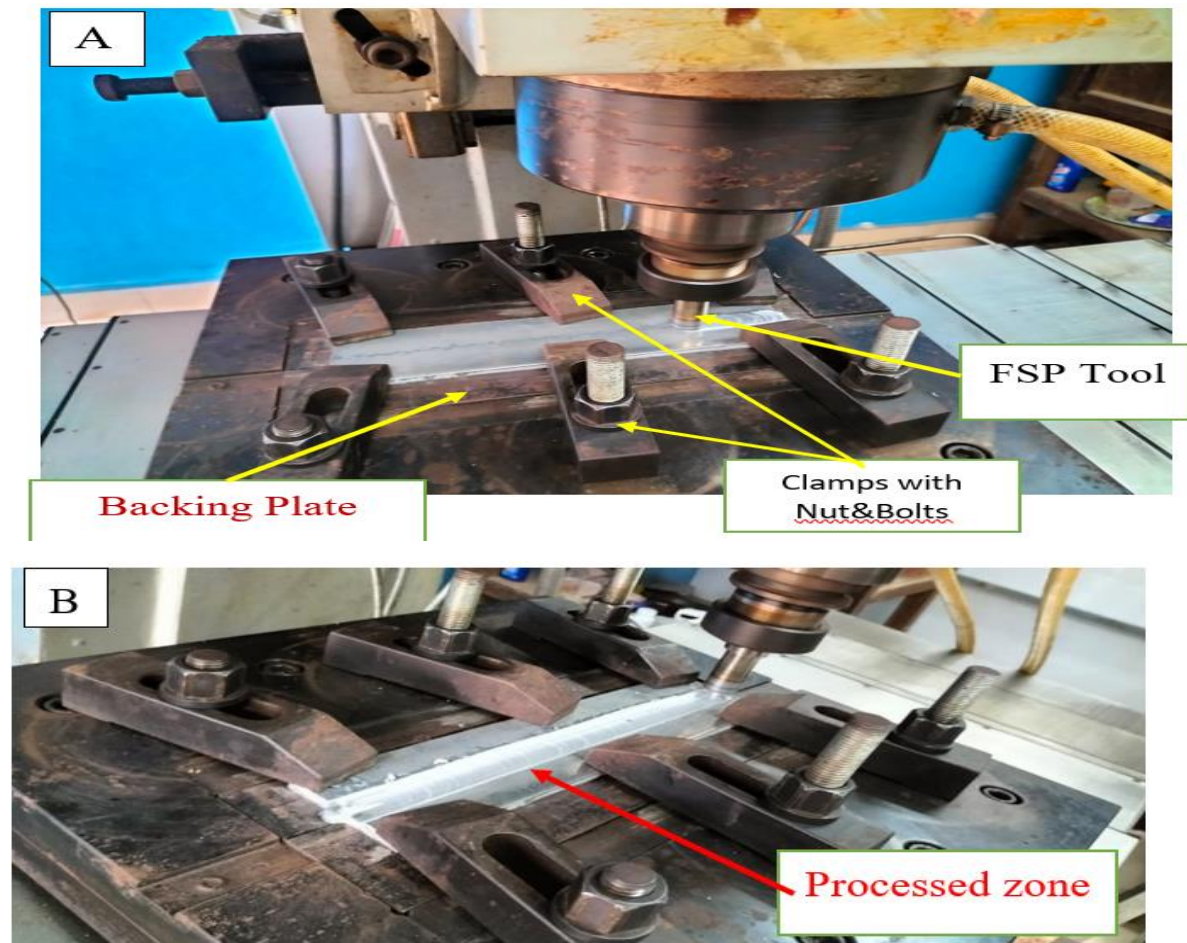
Macrograph showing the FSP on the Al6061 plate (a) Fixed on a chuck (b) FSP processed zone
